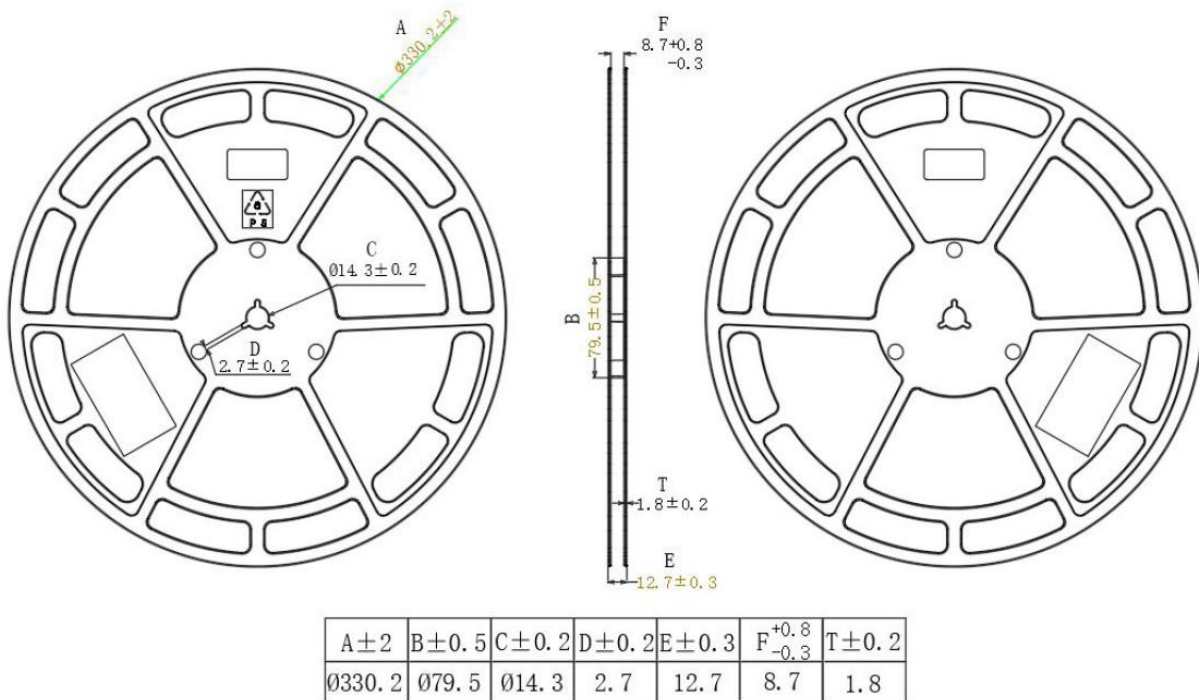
Reel dimensions for LUXEON 2835 Commercial Deep Dimming (L128-xxxxSA35A0DGx)
